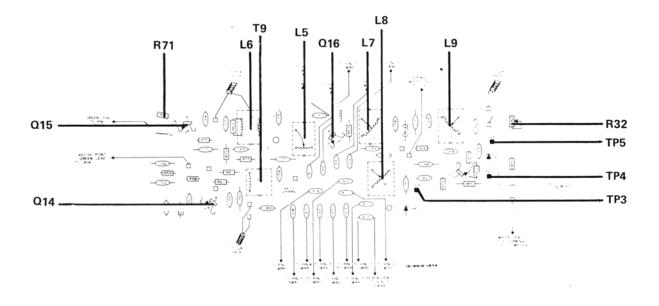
Test Point and Adjustment Locations for Synthesizer Board Alignment
